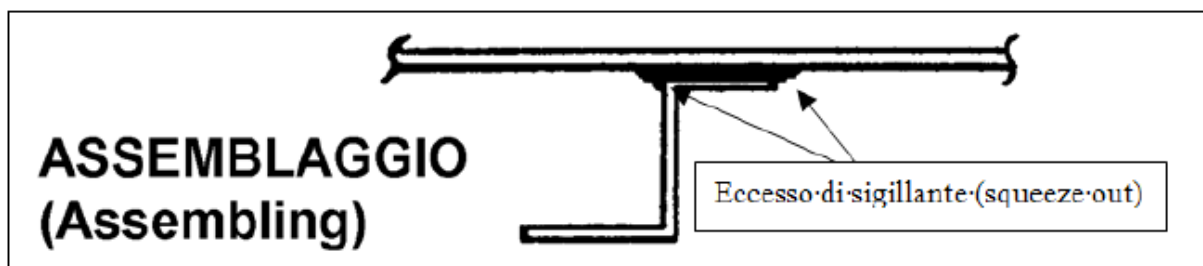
Check that the squeeze out of sealant is uniform along the edge, visible and enough to allow the correct final finishing of the sealing
